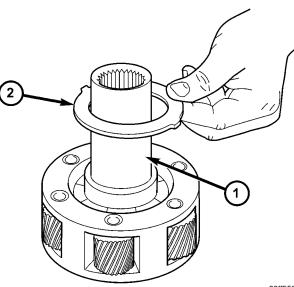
Remove Input Gear Retaining Ring 1 - INPUT GEAR
